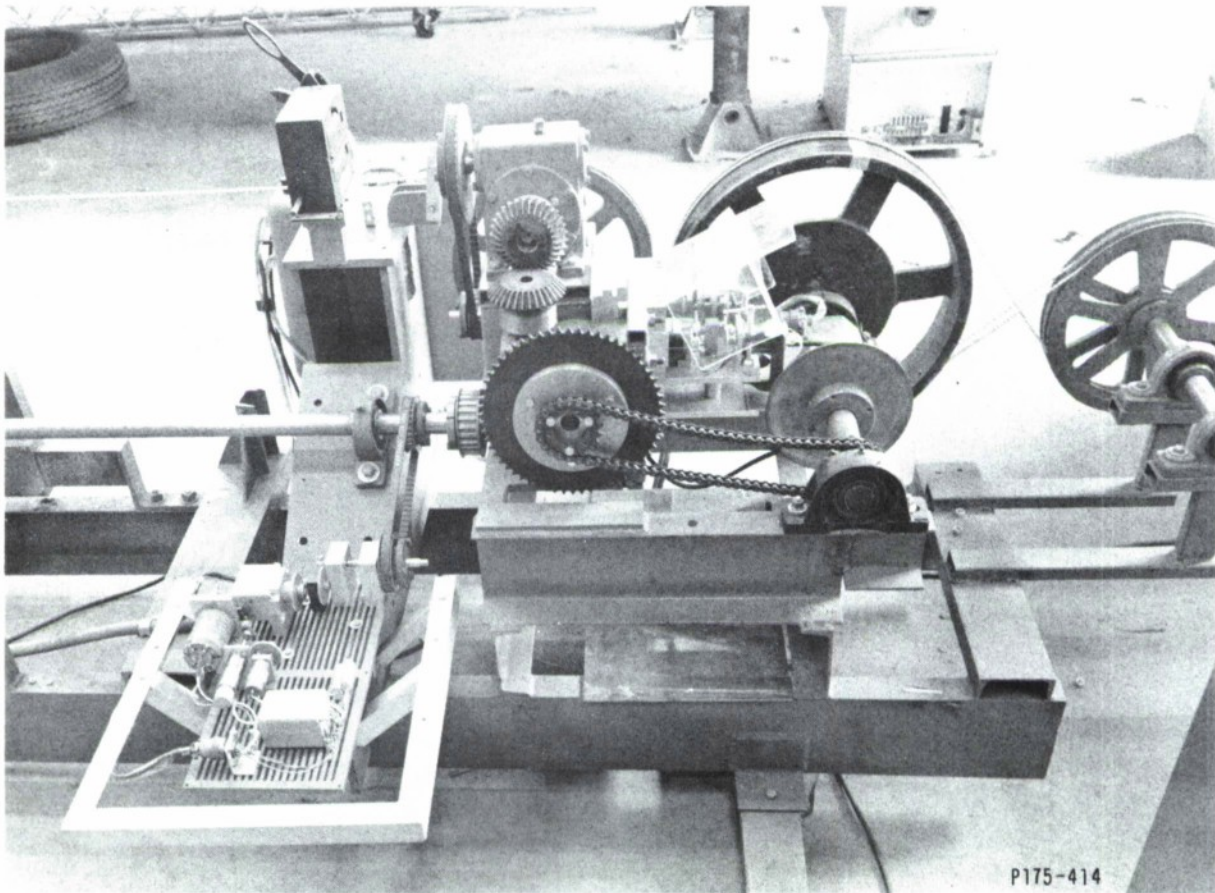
Rear view of taping machine showing some of the servo components on the mounting plate (near left).
